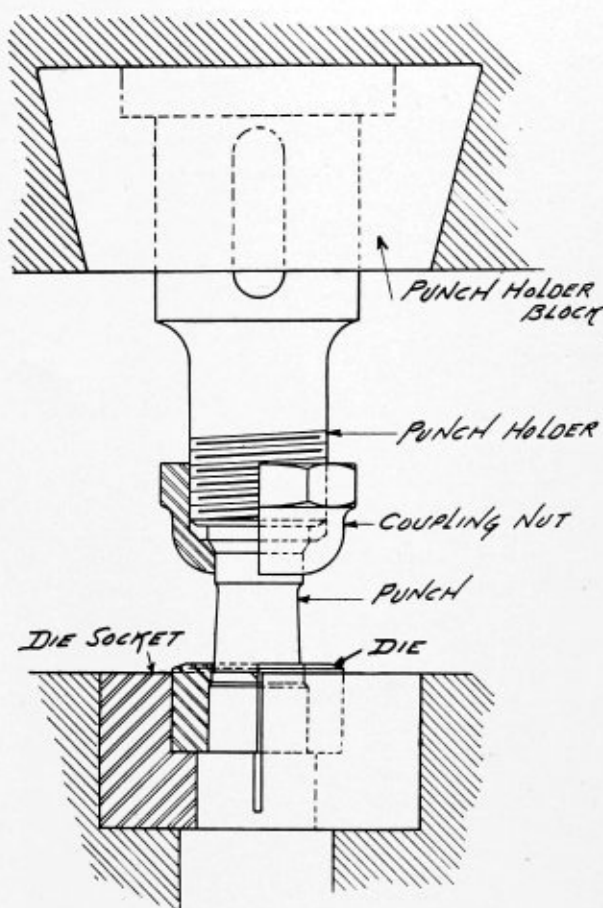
PUNCH, DIE AND COUPLING IN PLACE ON MACHINE.
